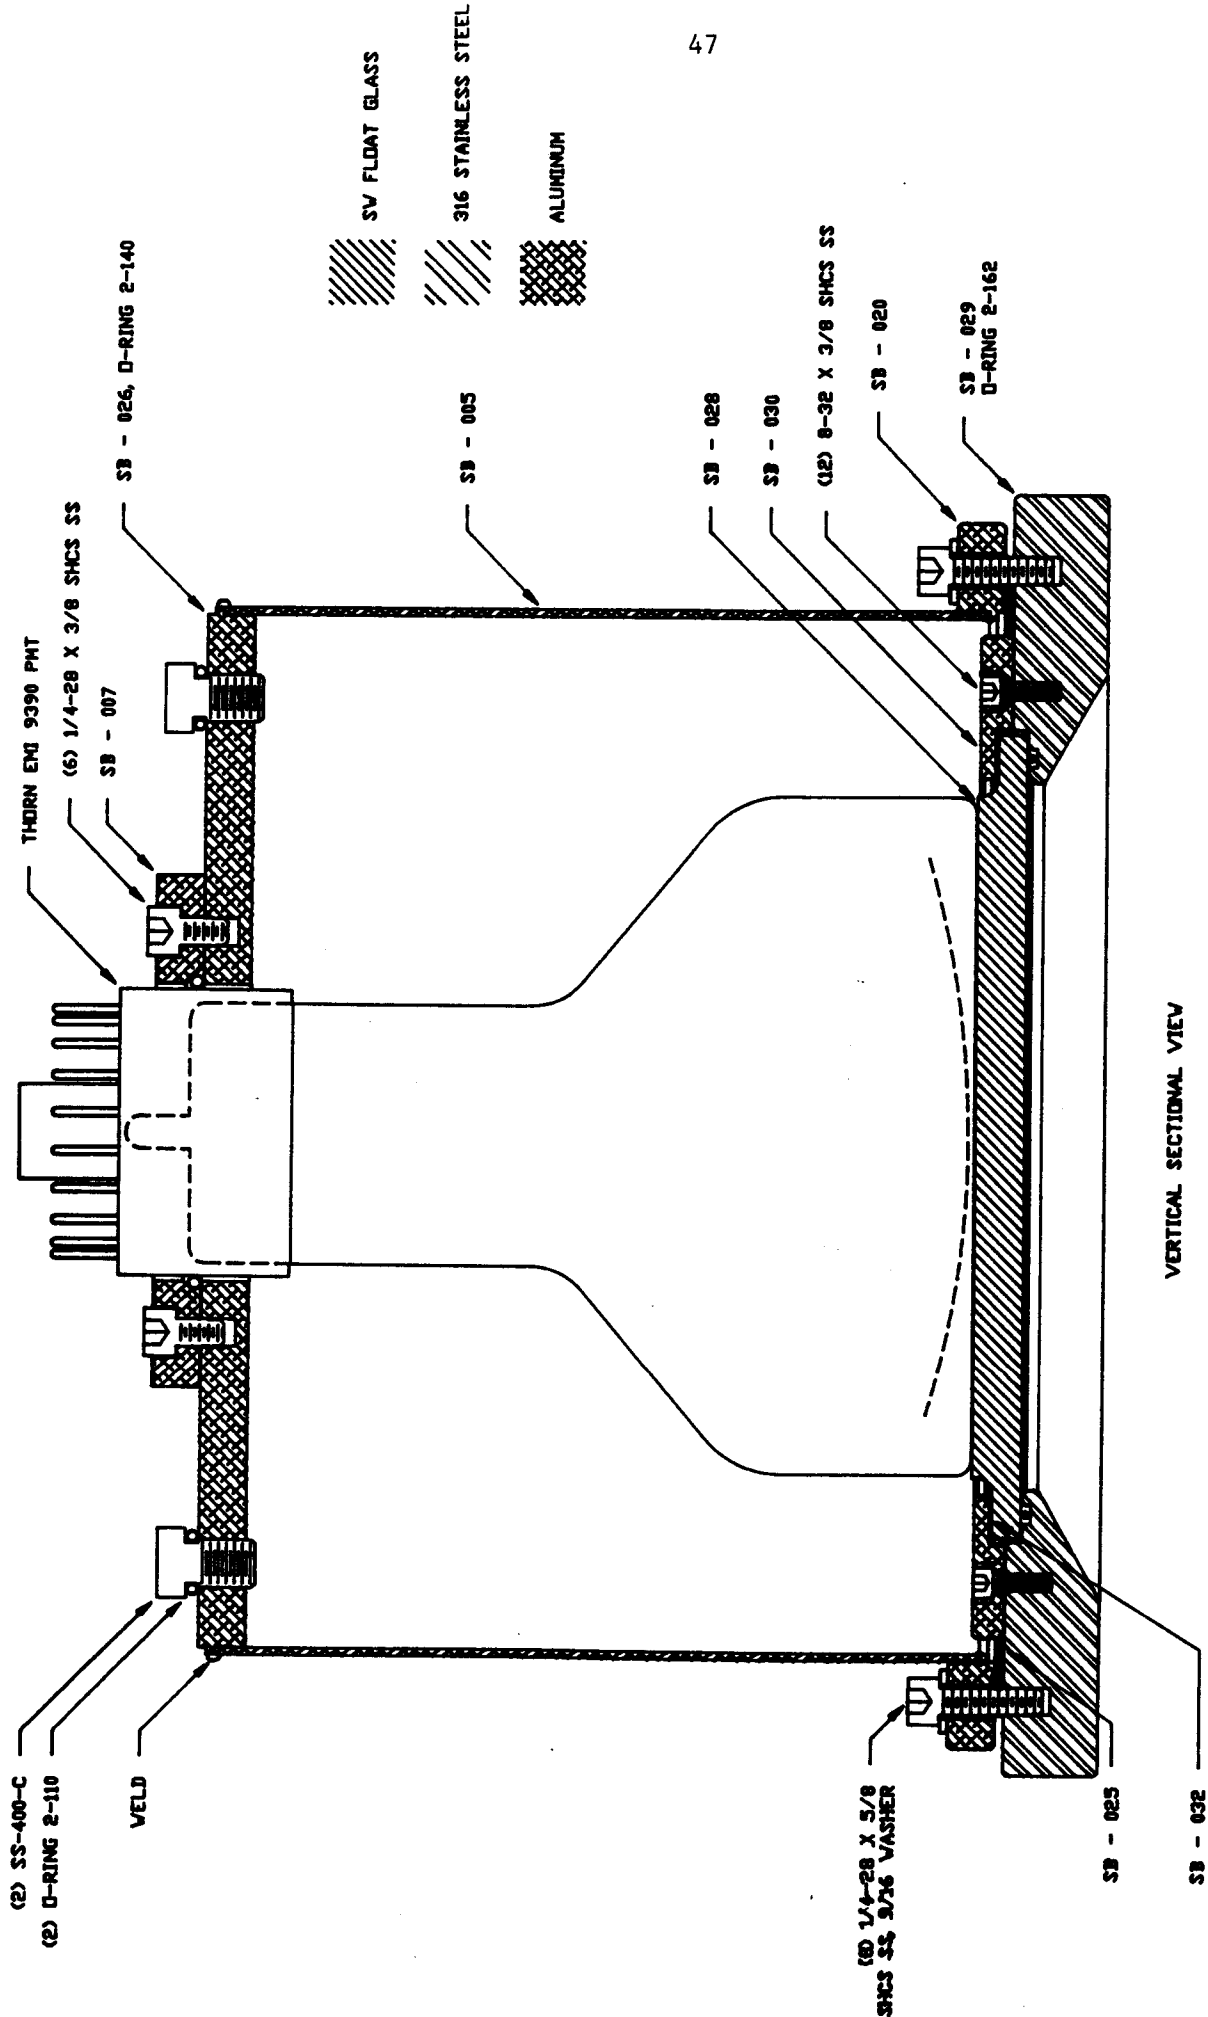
Vertical cross section of a photomultiplier assembly with window flange and housing.
